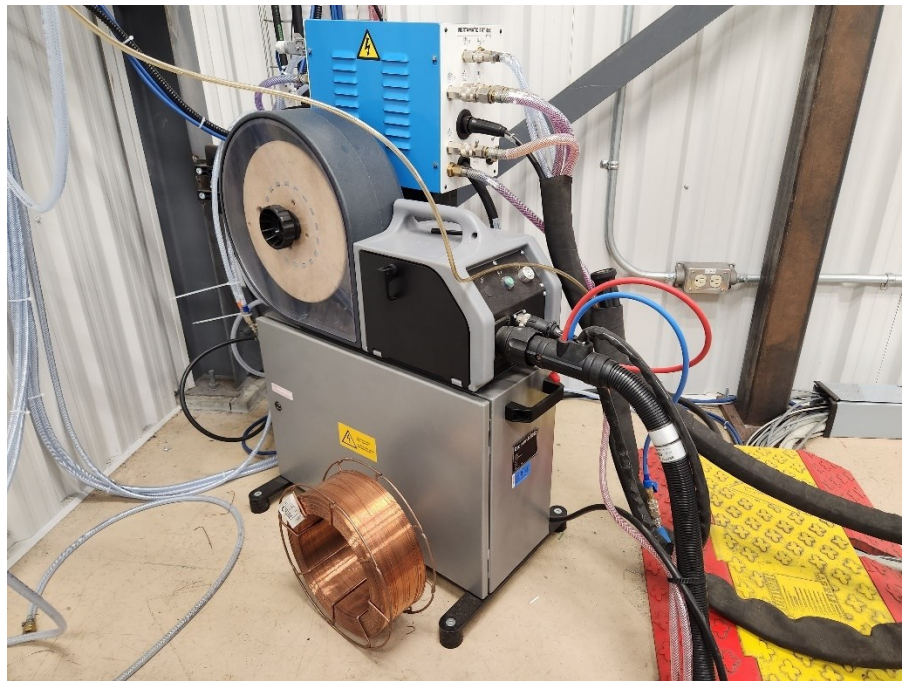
Wire spool connected to gun and Nertamatic plus machine.
